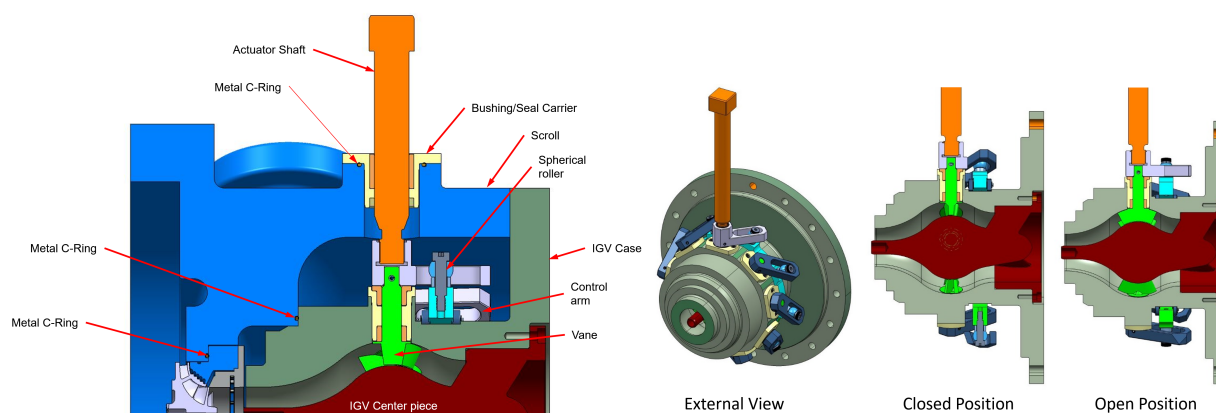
IGV Cross-Section Showing the IGV Assembly and First Stage Compressor (left); External View of the IGV along with a Cross Section Showing Opened and Closed Positions (right)
